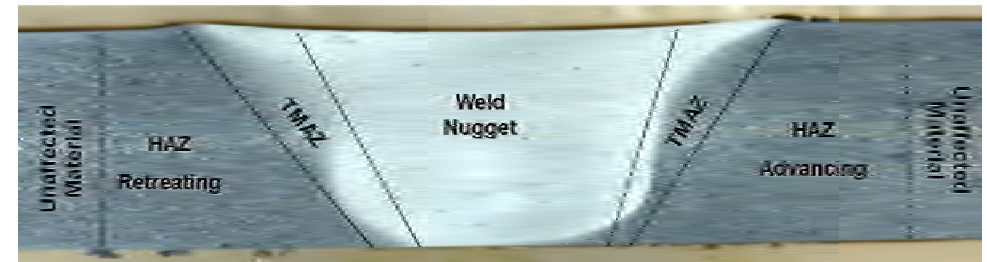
Typical friction stir weld nugget indicating weld zones (shown in aluminum).
